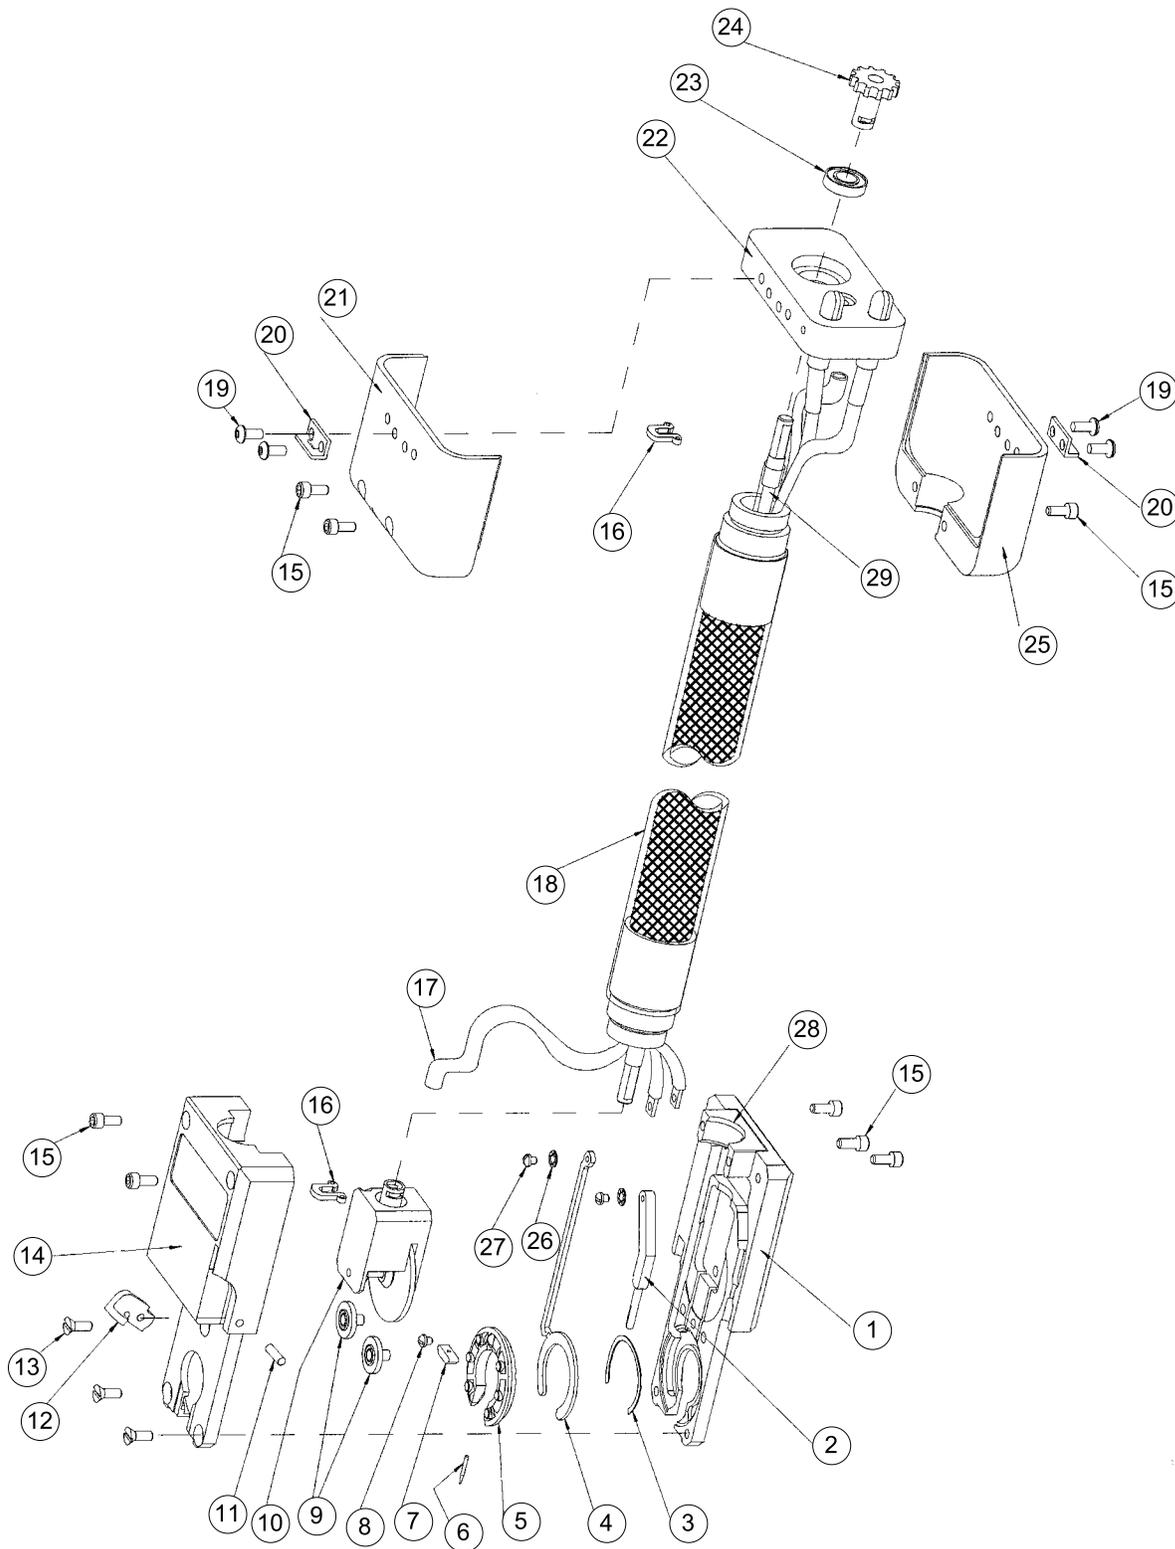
SWS-4MFH-B Flexible Weld Head
